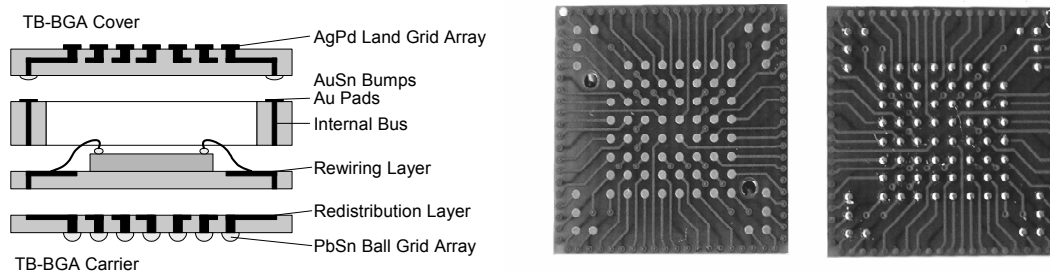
TB- BGA Package cross-section [2] and 17.5 mm FR4 module (land grid array left, ball grid array right)
